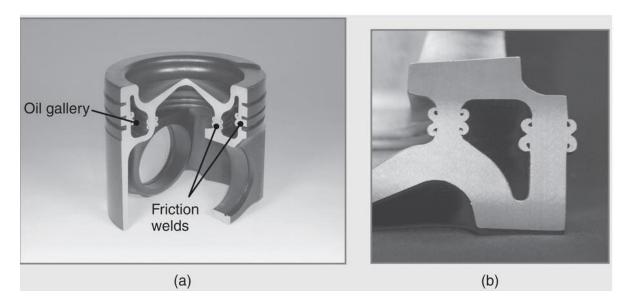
The Monosteel piston. (a) Cutaway view of the piston, showing the oil gallery and the friction-welded sections; (b) detail of the friction welds before the external flash is removed and cylindrical grooves are machined.
